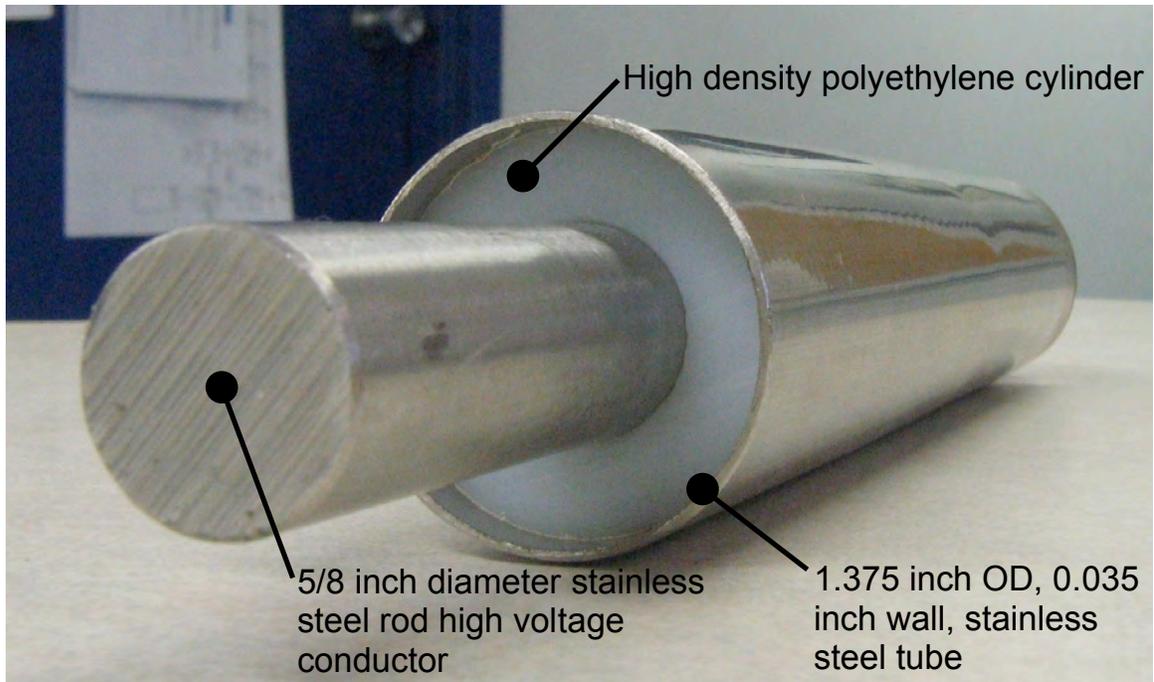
"Bo" high voltage feed thru pressure test sample piece.
